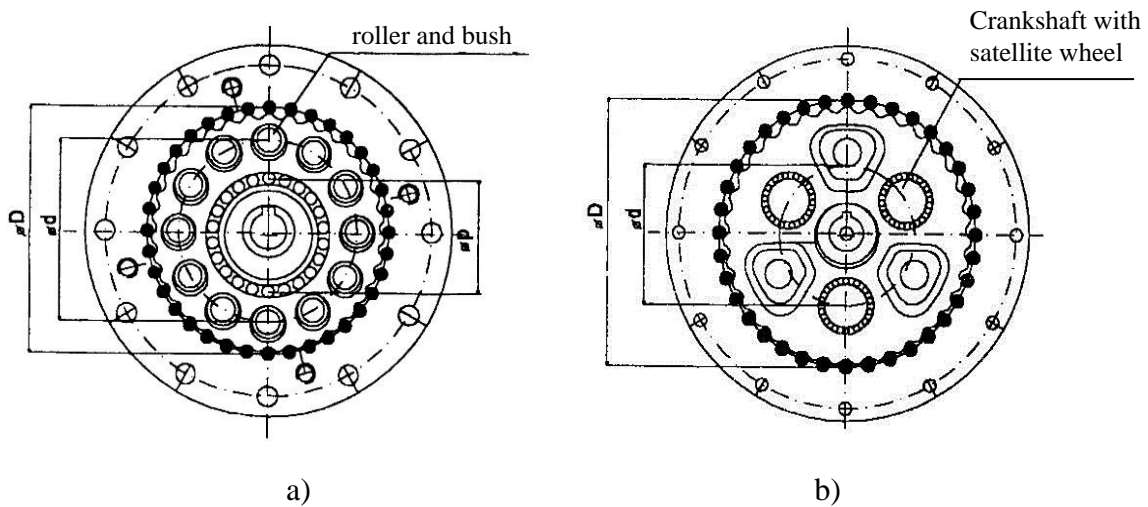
a) representation of rollers housed in bushings, wheel holes and needles on the circumference of the wheel cycloid, b) three crankshafts with satellite wheel connected via bearings with cycloidal wheels
